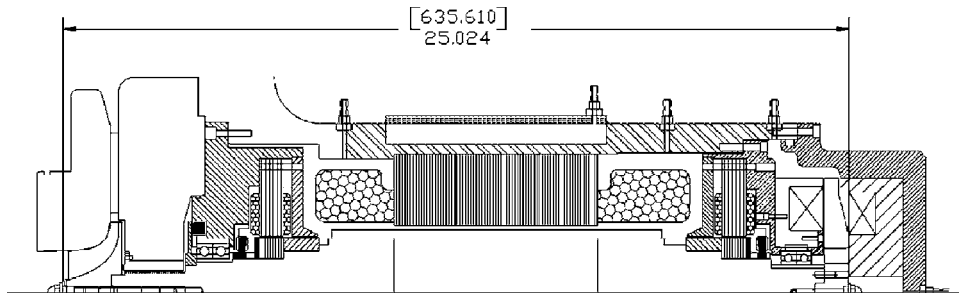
Crosssection of expander generator with nominal 114 mm (4.5 in) wheel
